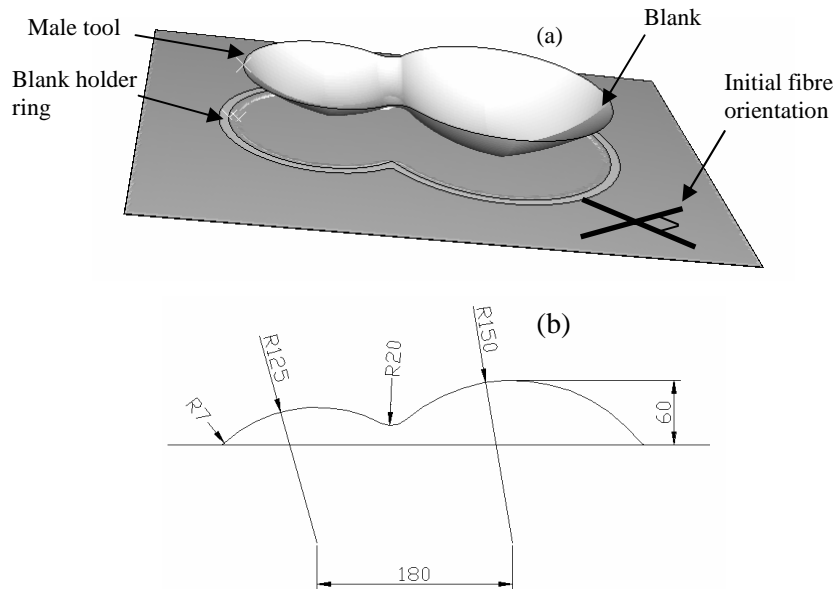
(a) Double-dome forming simulation set-up showing male tool, blank holder ring and blank. A slightly larger matched female tool is positioned below the blank (3 mm gap between tools). Initial fibre orientation is shown on the blank. (b) Dimensions of the male tool in mm
